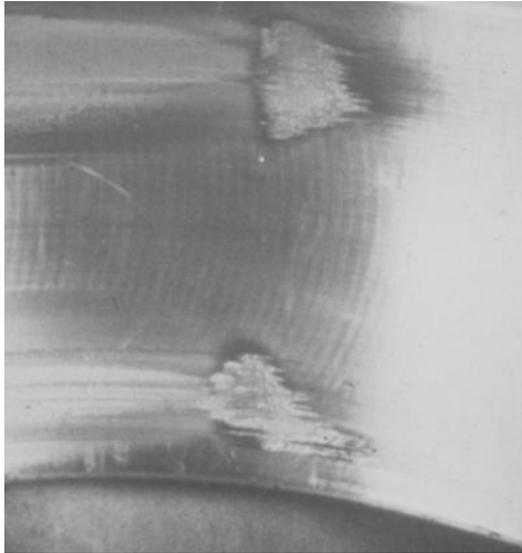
example of damage related to smearing at spherical roller bearing outer ring at entrance of load zone [4]
